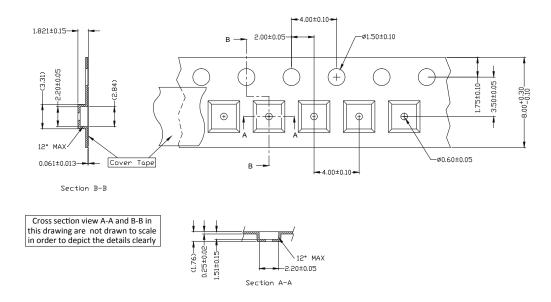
Pocket Tape dimensions for LUXEON C Color Line.
